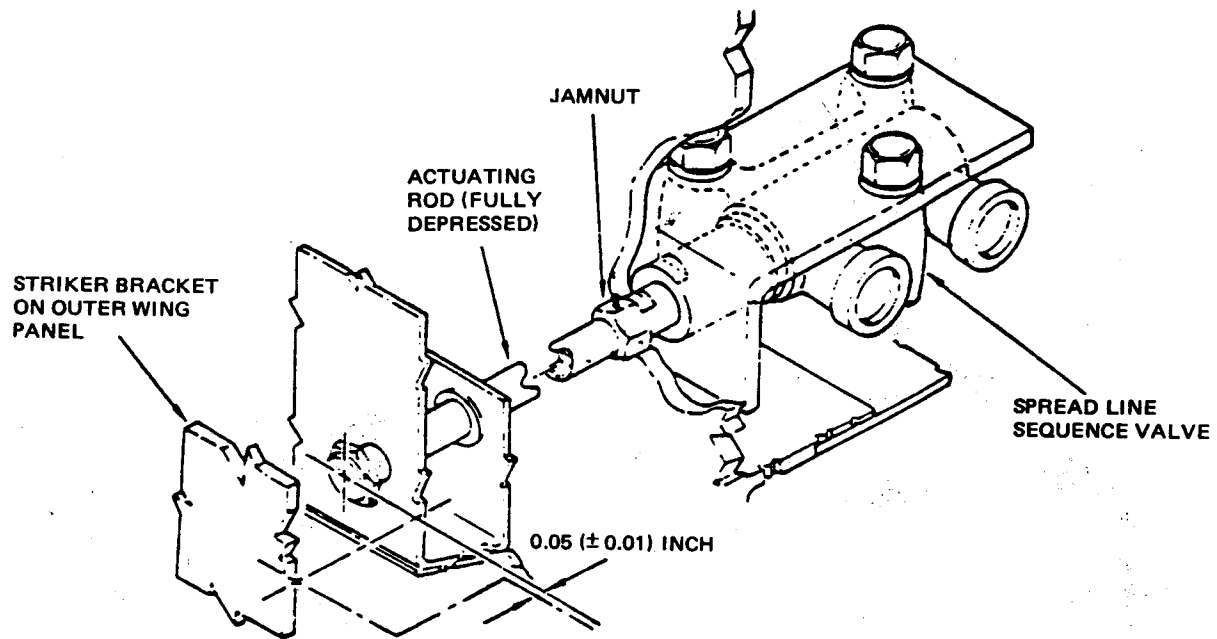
B. Spread Line Sequence Valve Pushrod Adjustment
